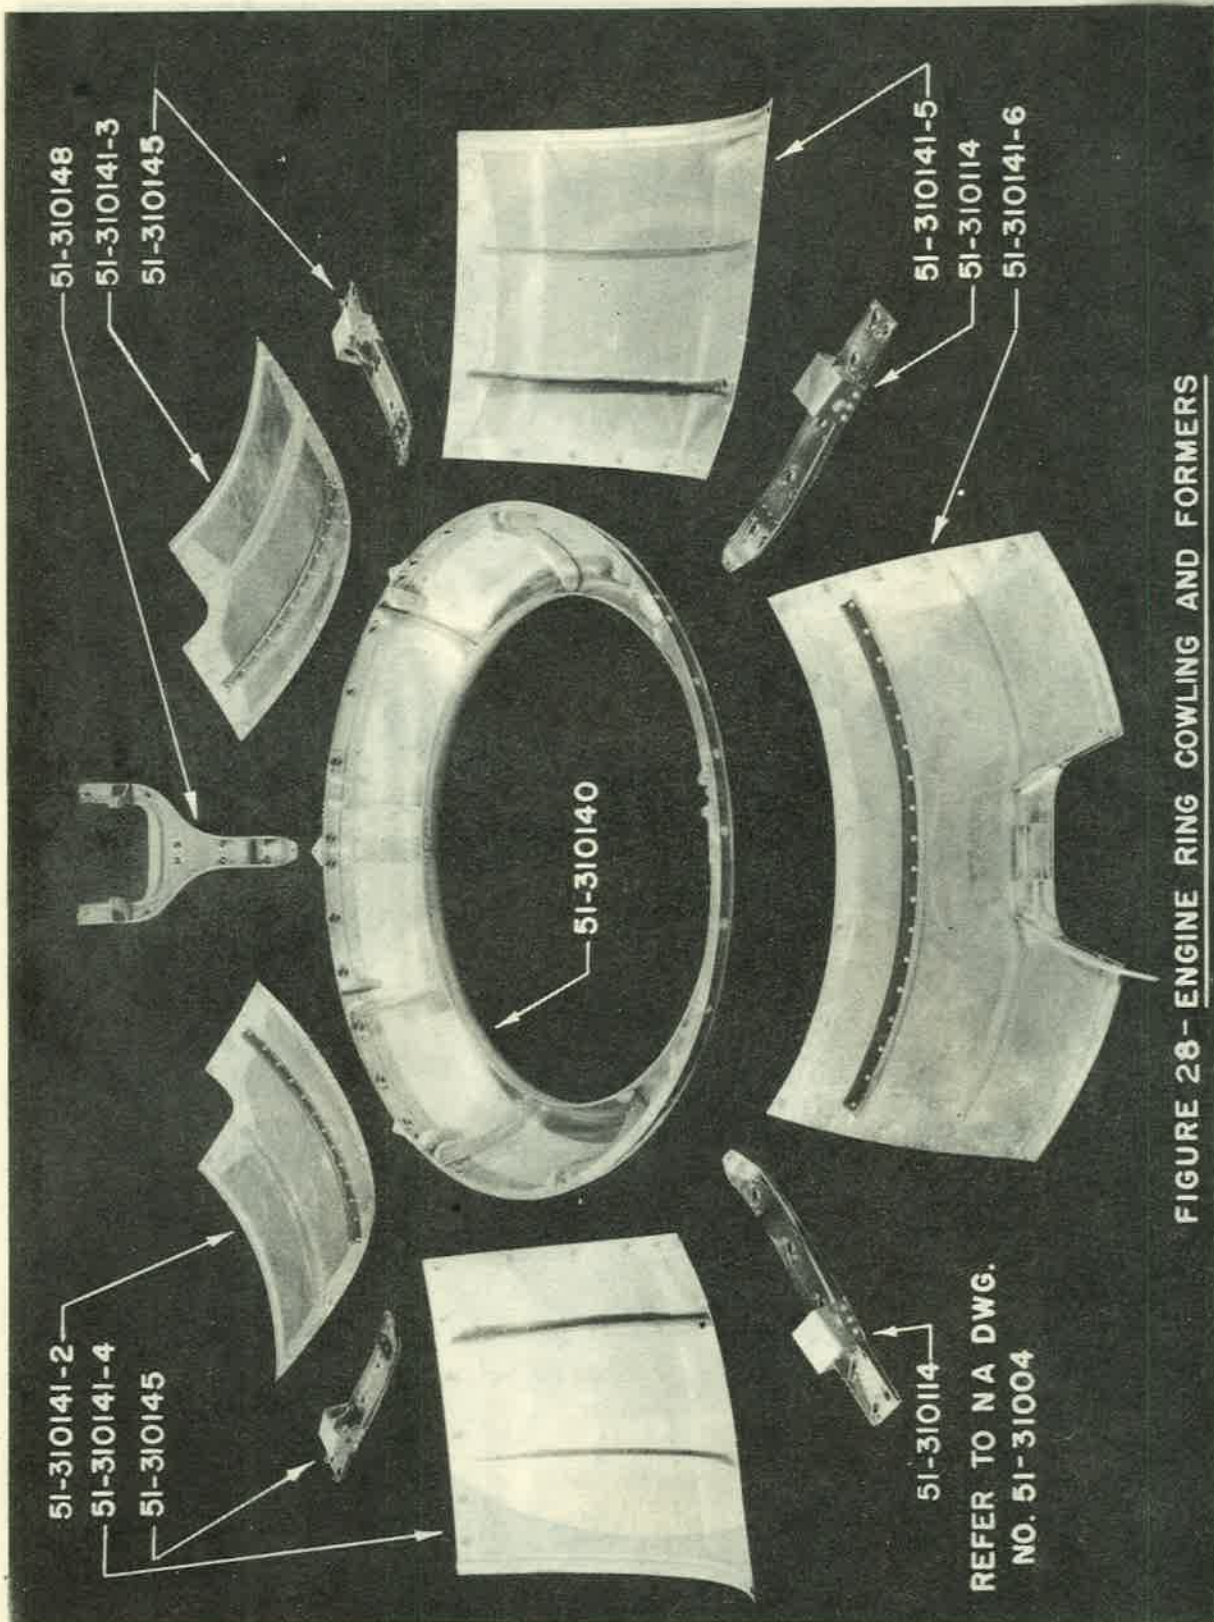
ENGINE RING COWLING AND FORMERS
